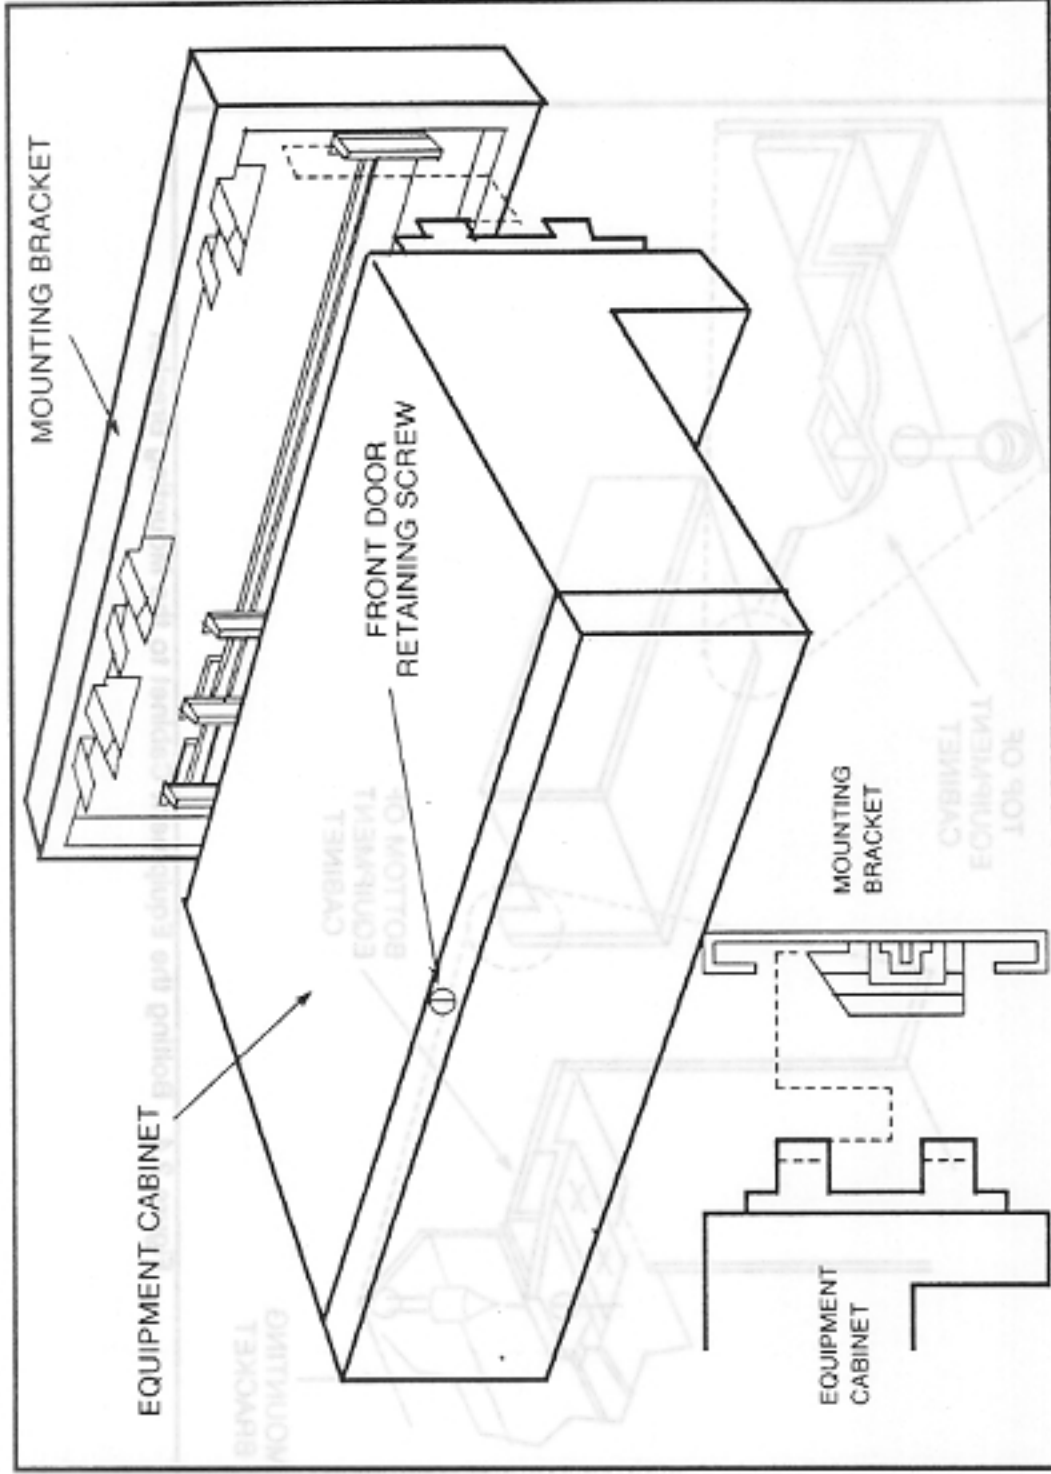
Lowering the Equipment Cabinet onto the Mounting Bracket
